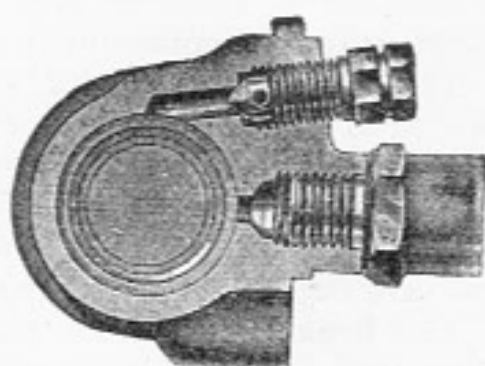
A BLEEDER VALVE IS SITUATED AT THE TOP OF EACH BRAKE DRUM CYLINDER
